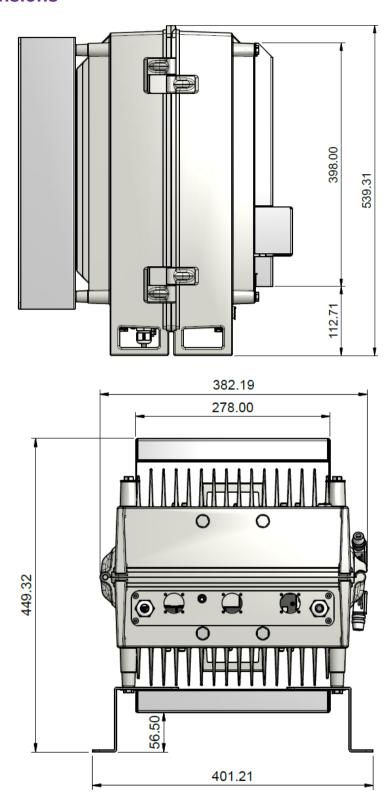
MBF-40 including Fan Hood – Assembly Dimensions
